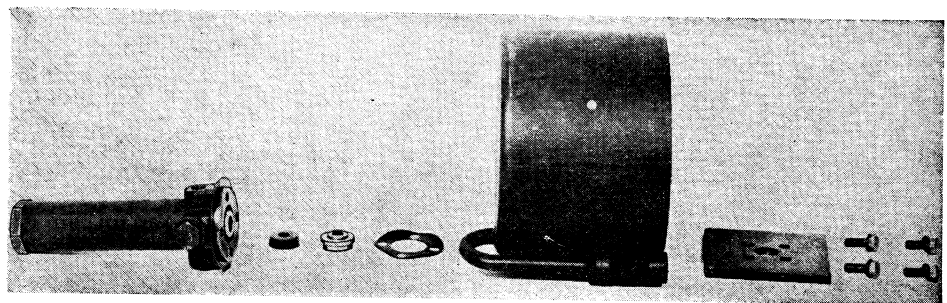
Hydraulic cylinder removed from rear cylinder shell and push rod seal parts removed
